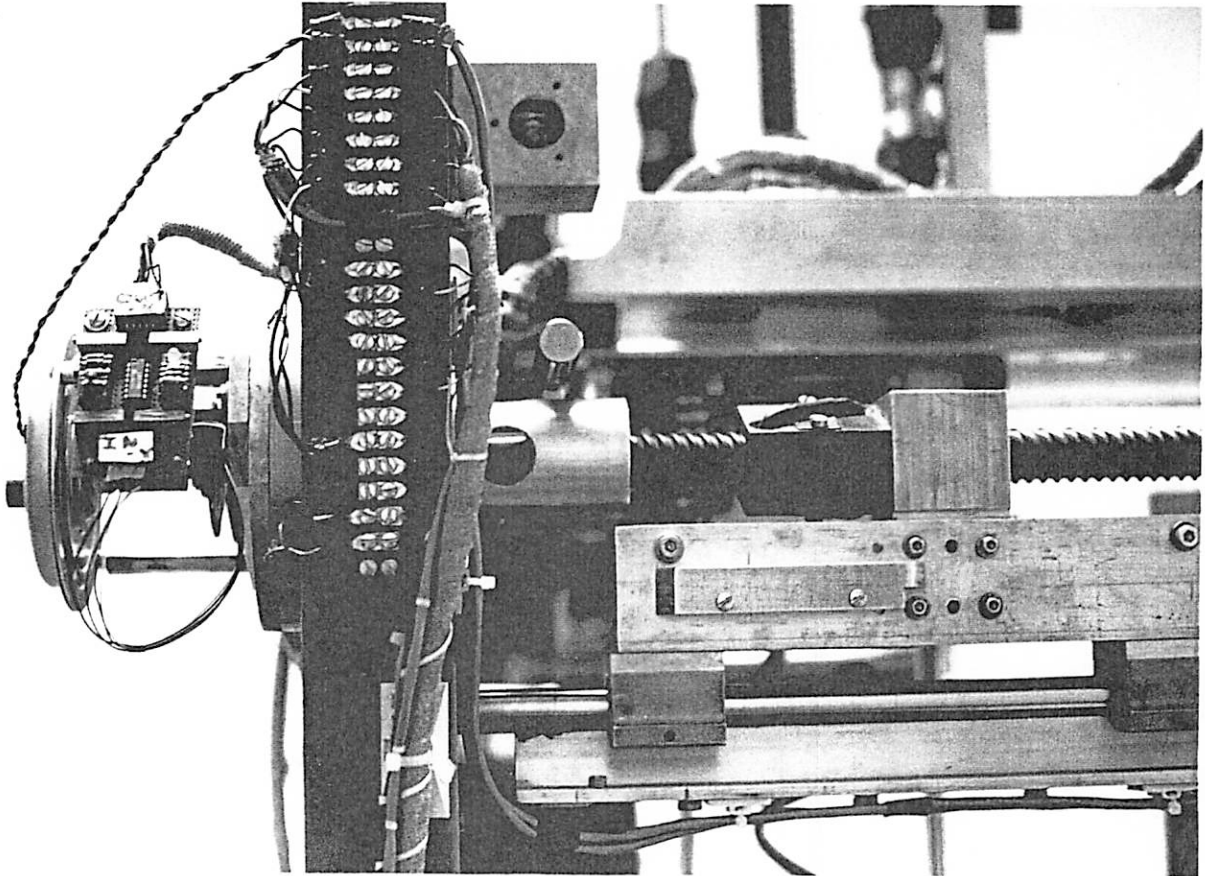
Motor and Ball Screw Assembly for x axis.
